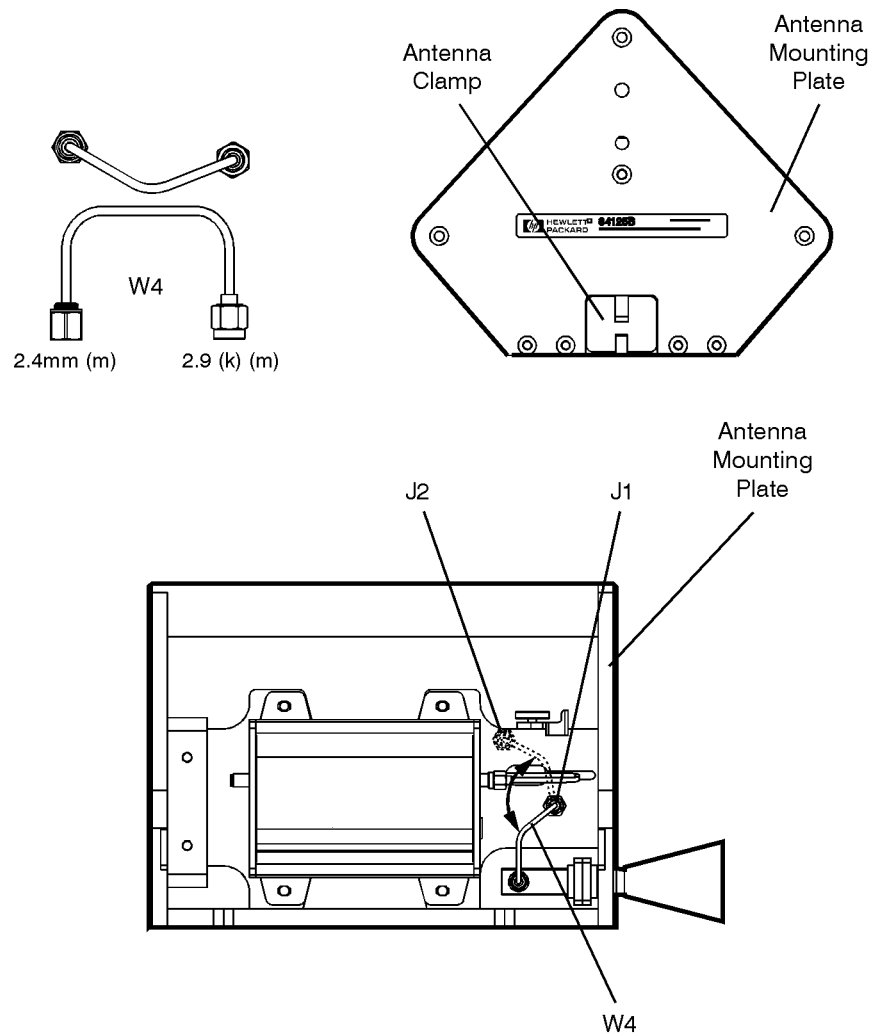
18 to 26.5 GHz Test-Set Configuration (side view)
